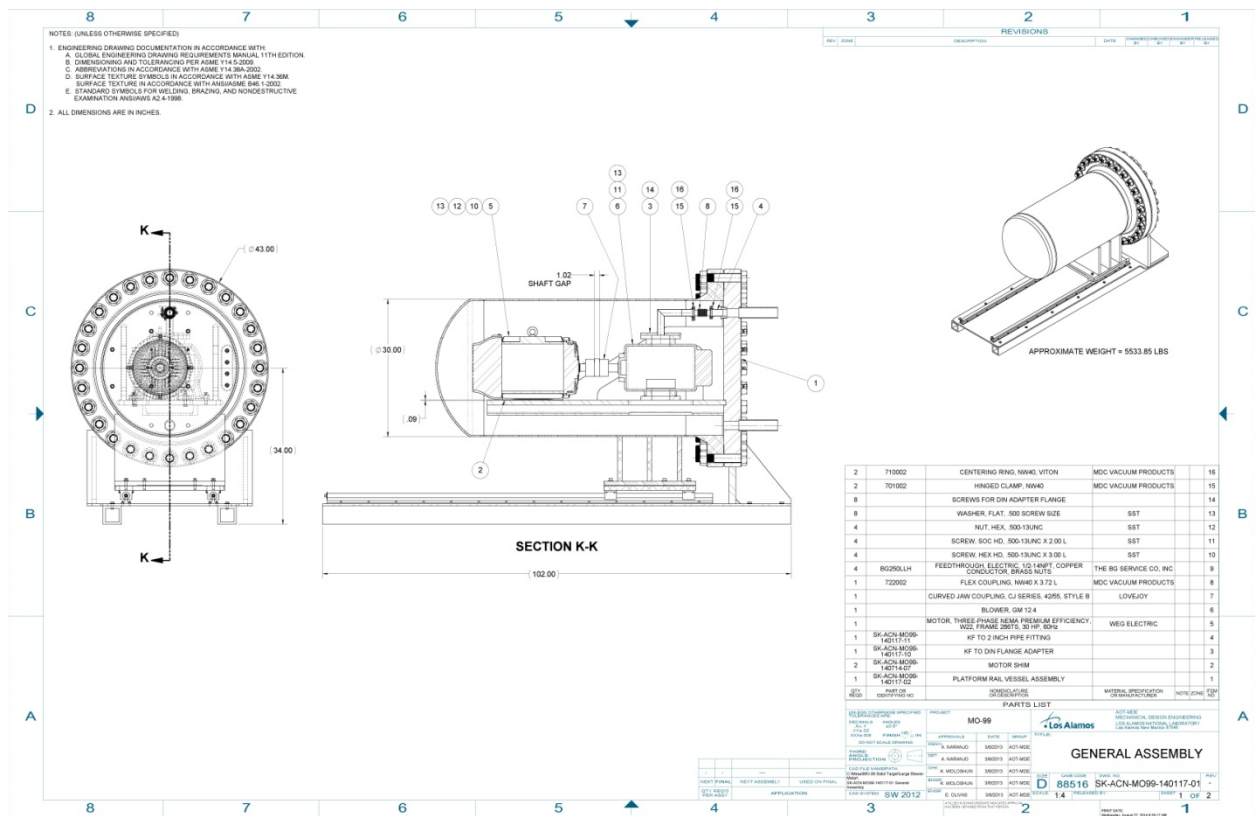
Drawing of the blower and motor in the pressure vessel, indicating overall dimensions.
